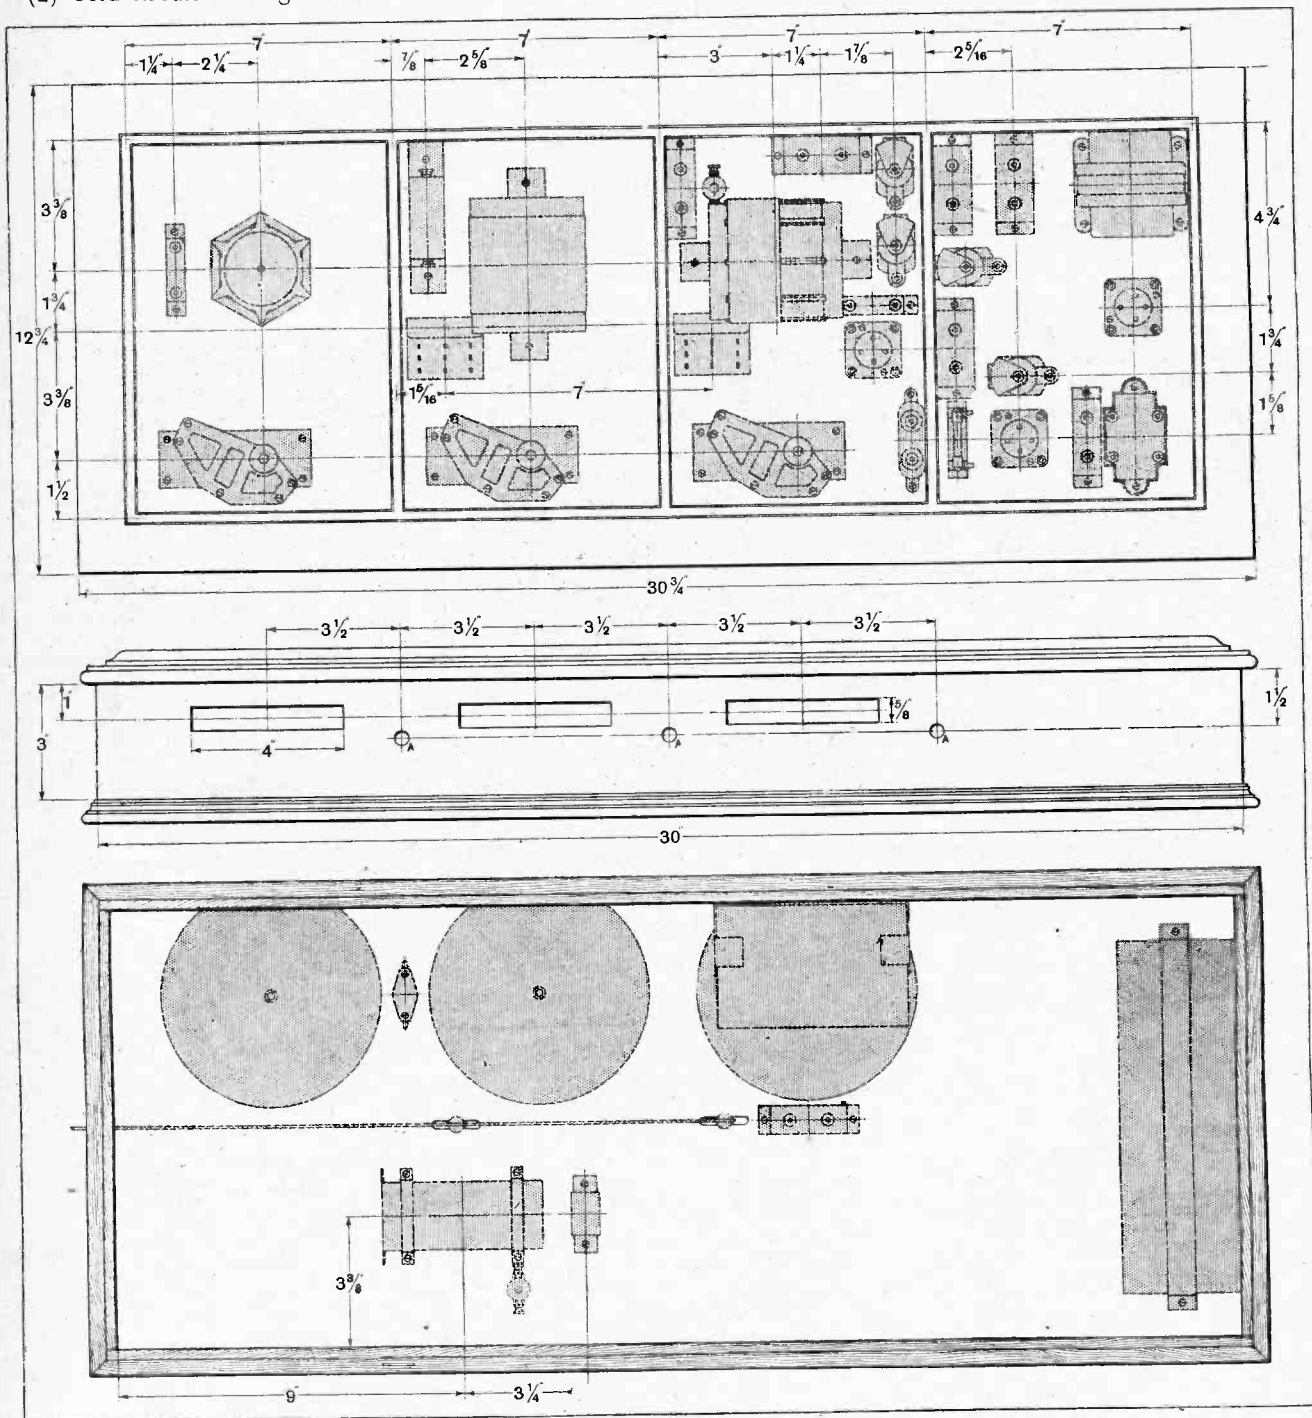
Layout of components above and below baseboard. The holes A are $\frac{3}{16}$ in. in diameter.
